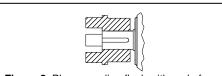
Place coupling flush with end of motor shaft and tighten setscrew.
